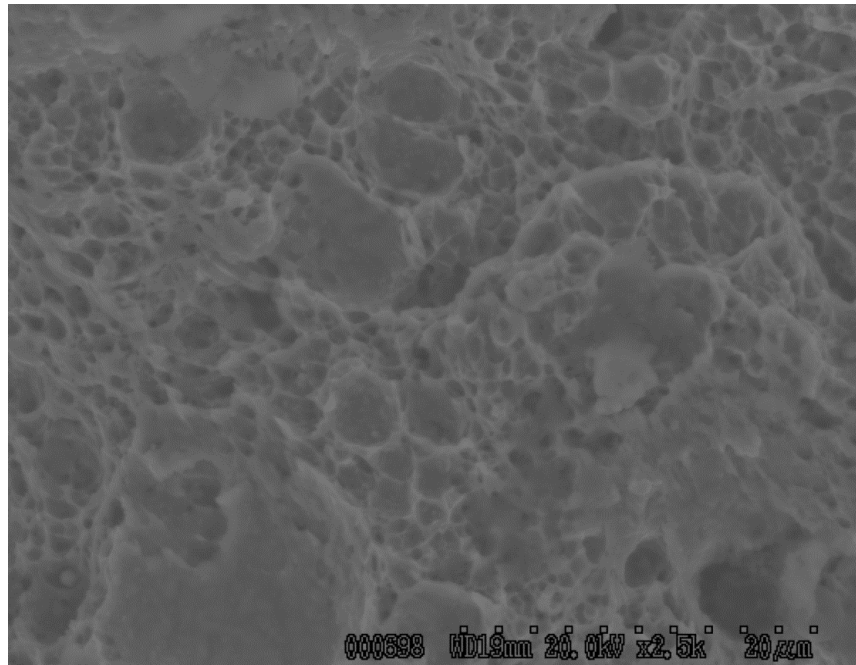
Scanning electron microscope fractograph of generator shaft fracture subsegment "A", Area 1.
